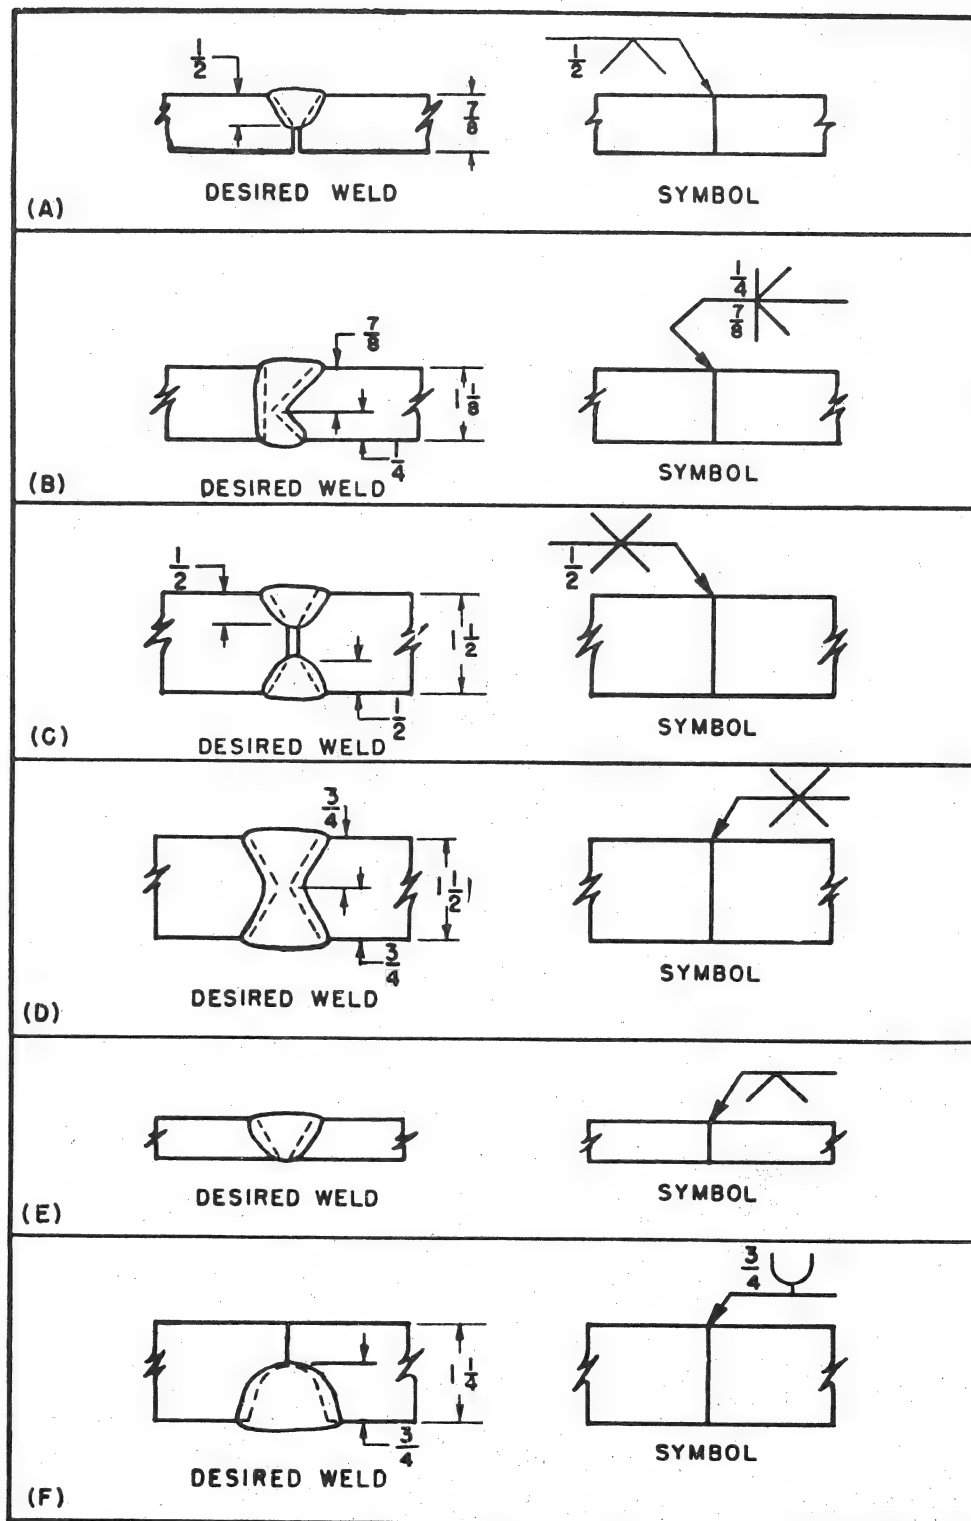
Designation of Size of Groove Welds with No Specified Root Penetration
